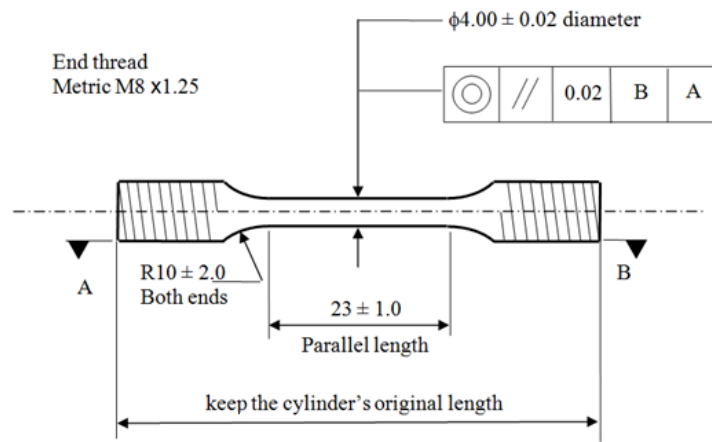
Dimensioned drawing of M8 threaded tensile test bar used for room temperature and elevated temperature tensile tests.
